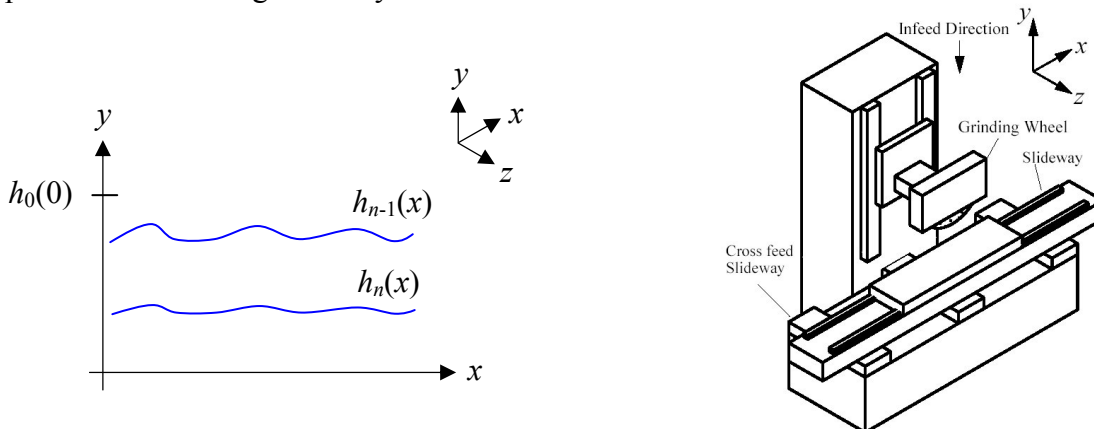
Surface profiles during machining Fig. 2 High speed table motion in surface grinding
